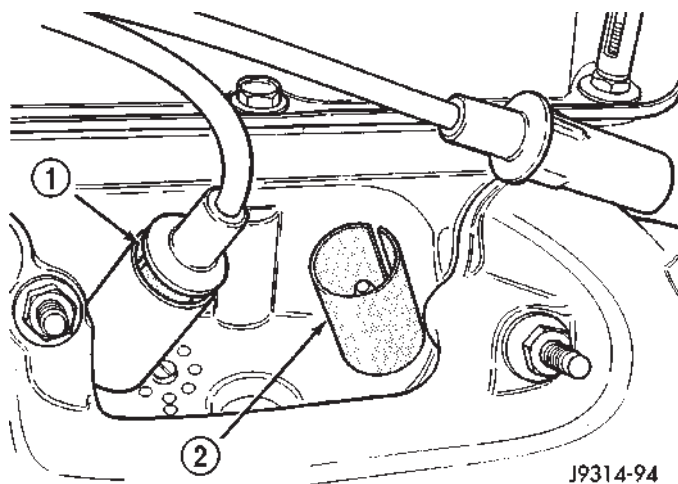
Heat Shields—3.9L/5.2L/5.9L Engines
